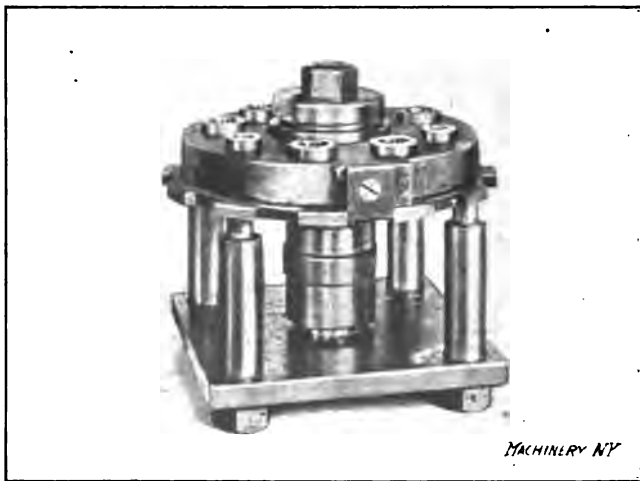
Jig for Drilling the Bolt and Pivot Holes in the Gear Case Covers. Another Jig for the Same Operation is shown at the Left of Fig. 34
